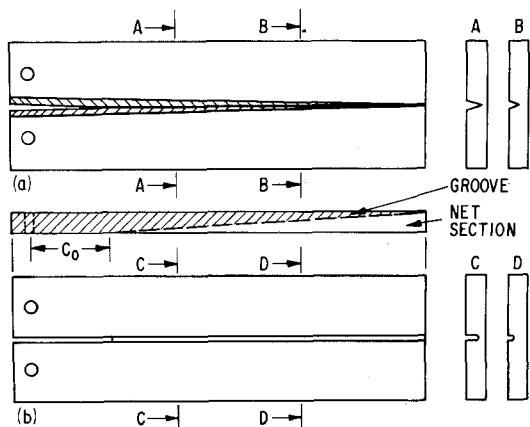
SG DCB specimens with tapered net section thickness and grooves that are, (a) V shaped, and (b) parallel-sided. Dimensions not to scale.
